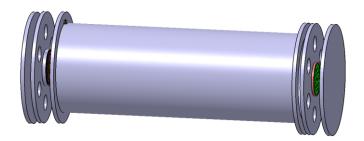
(g) CATIA V5 model of vacuum chamber with ionizer assembly
